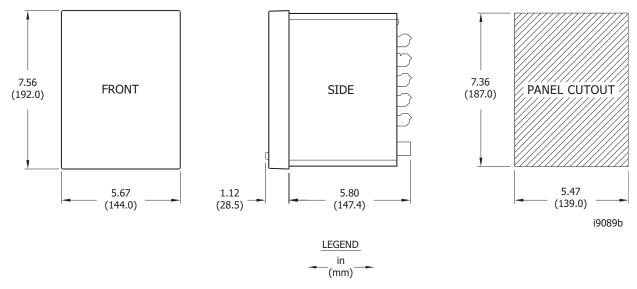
SEL-710-5 Dimensions for Rack- and Panel-Mount Models
